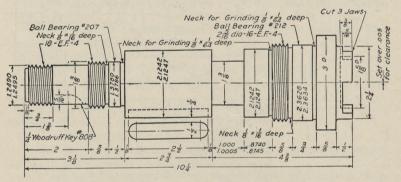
Tolerance dimensions (clutch shaft).
